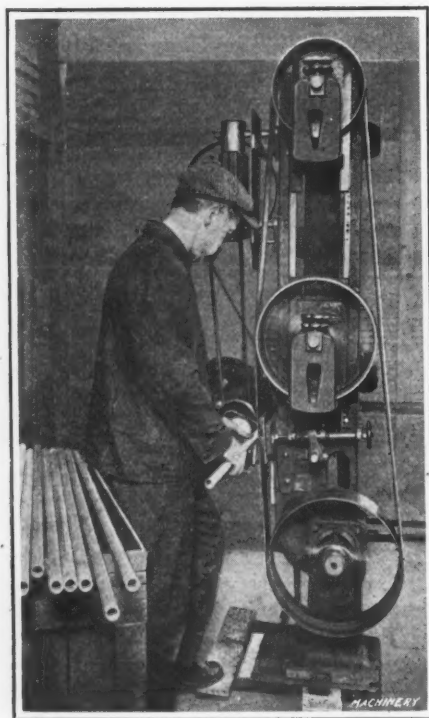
Abrasive Belt Type of Polishing Machine with a Corrugated Leather Belt to support Abrasive Belt
